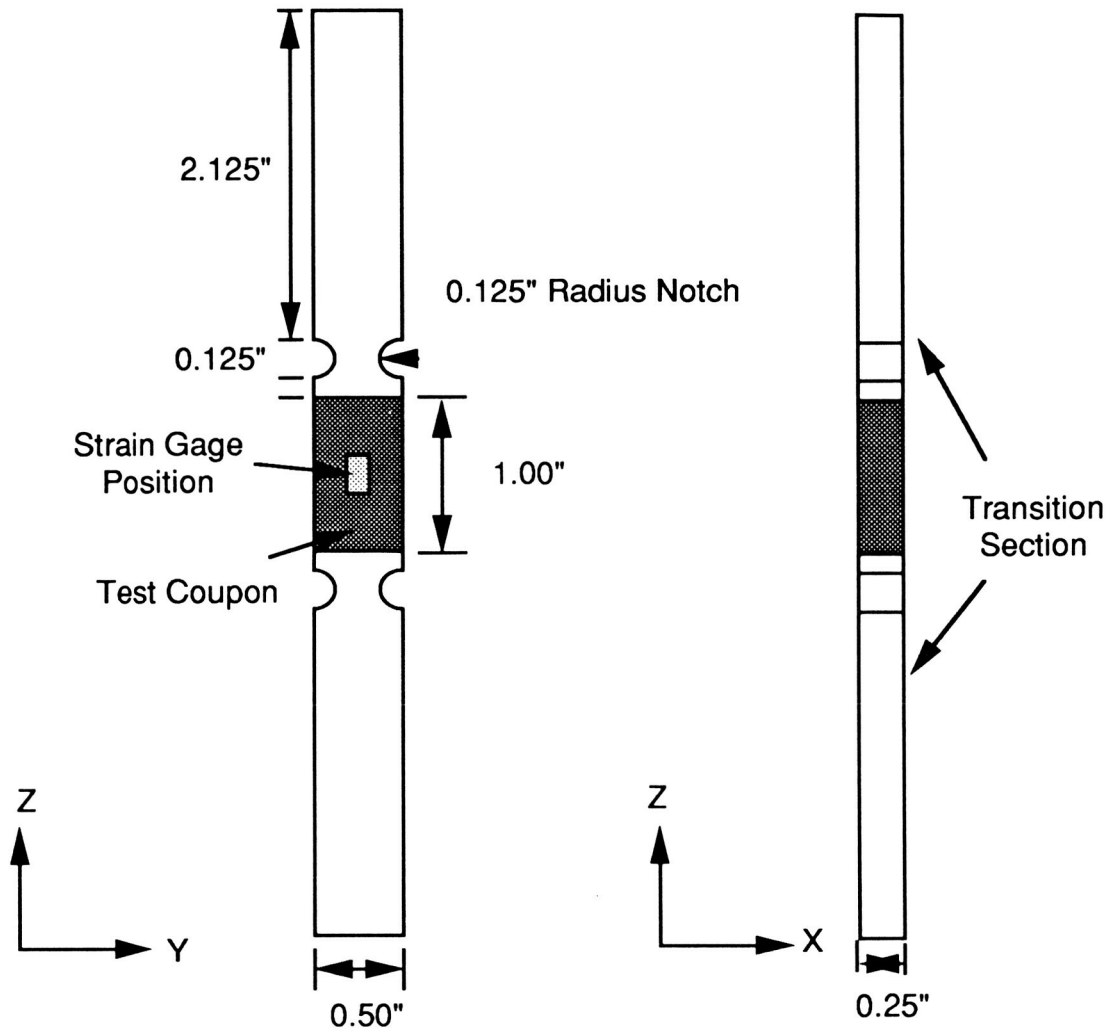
Dimensions of Generation 3 bi-material tensile specimen.
